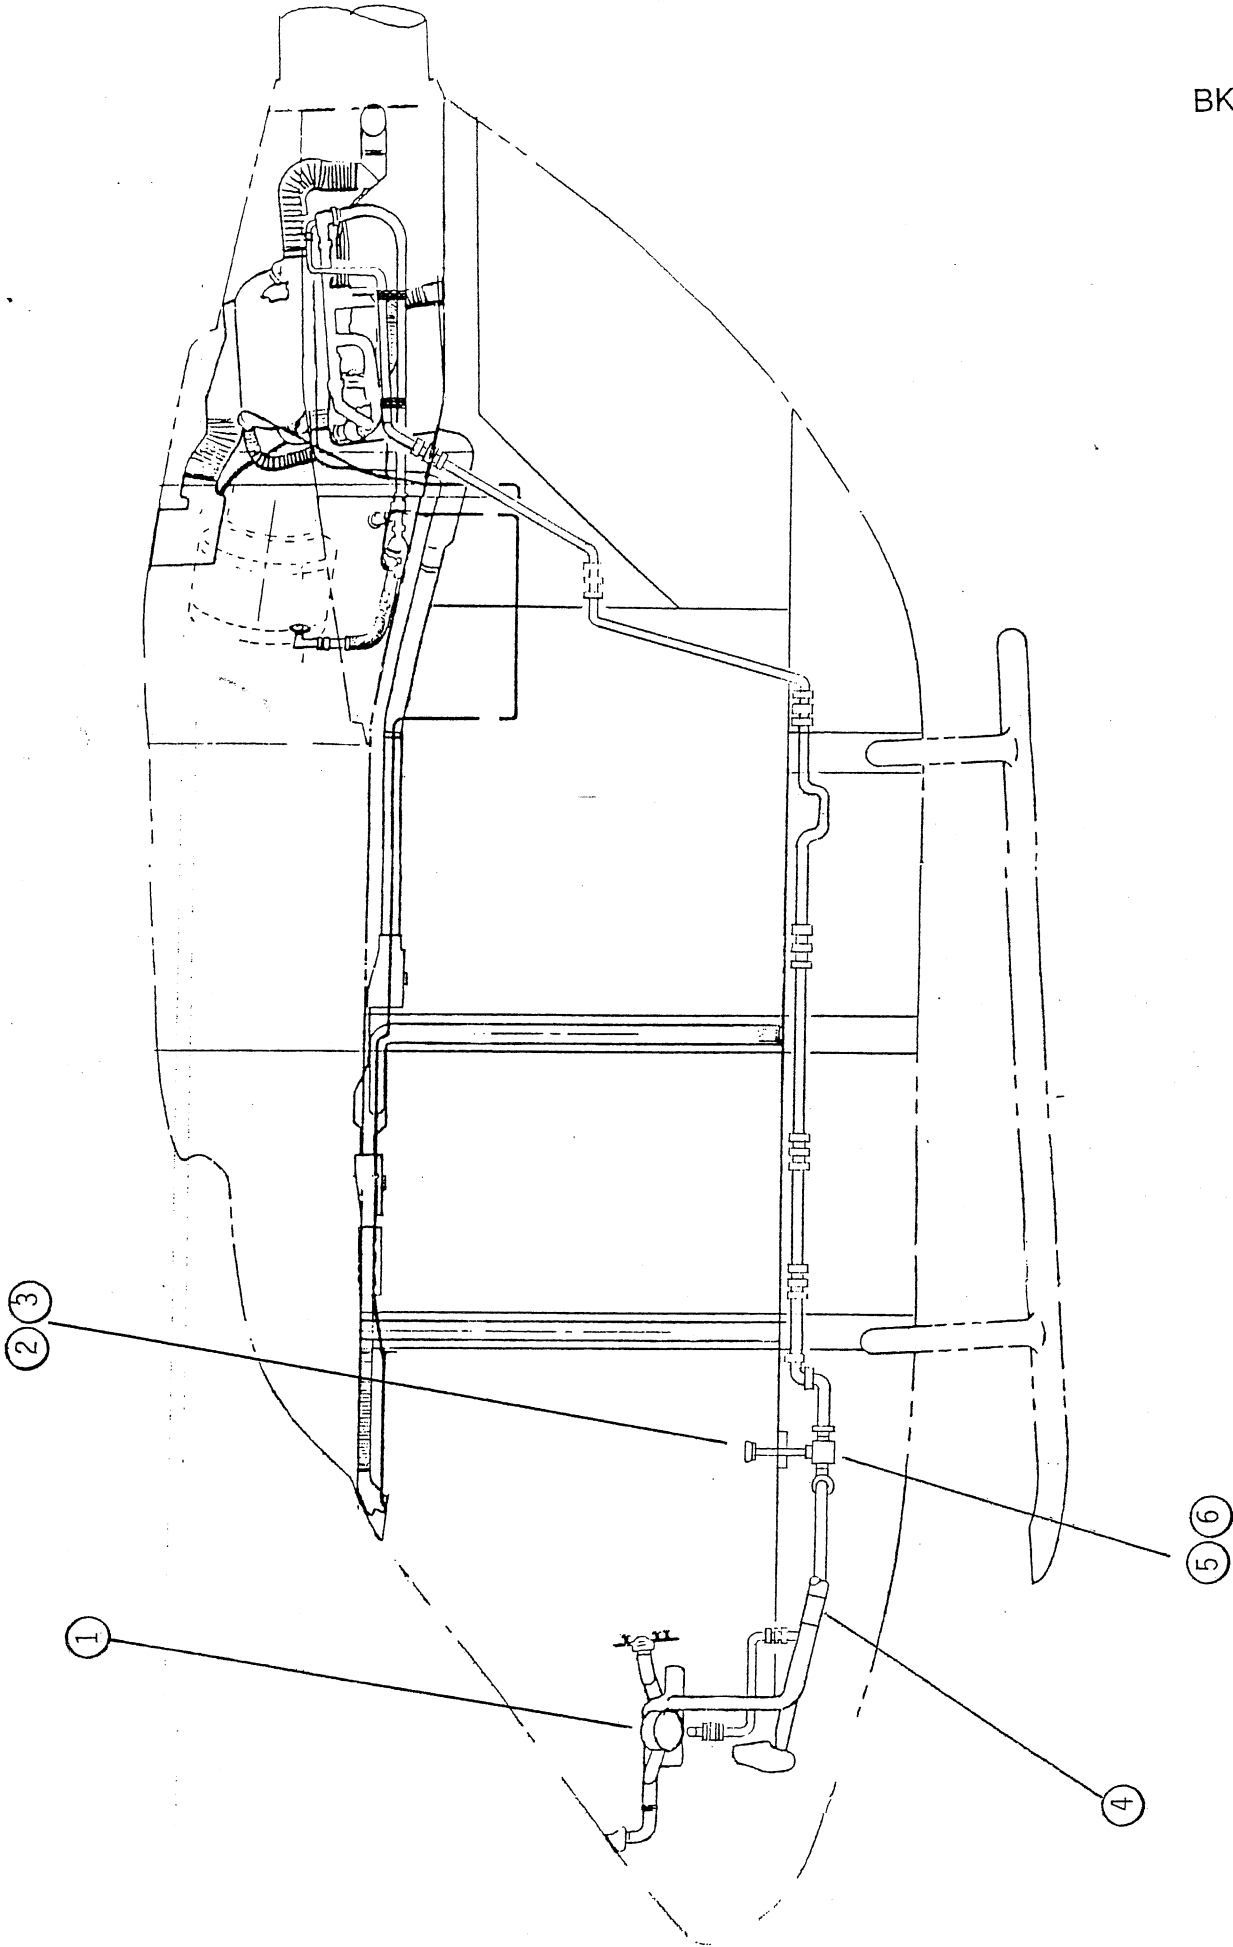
BK117 Cockpit Heater/Windshield Defroster System
